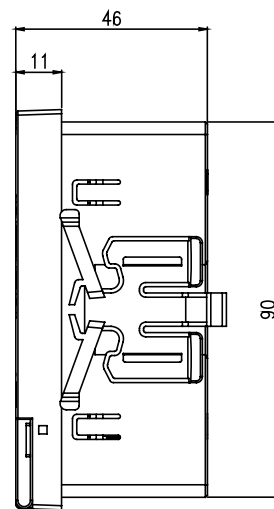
ALP220-EF Side View Dimensions (Unit: Mm)
